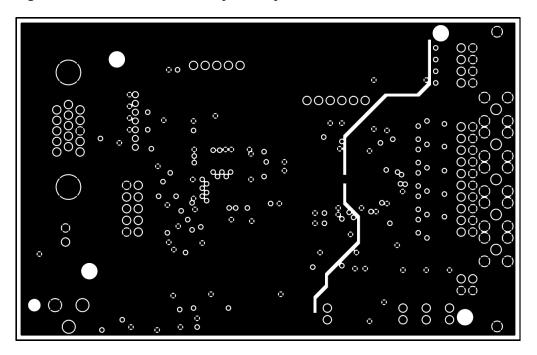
GPX2-EVA BOARD Layout: Layer 2
